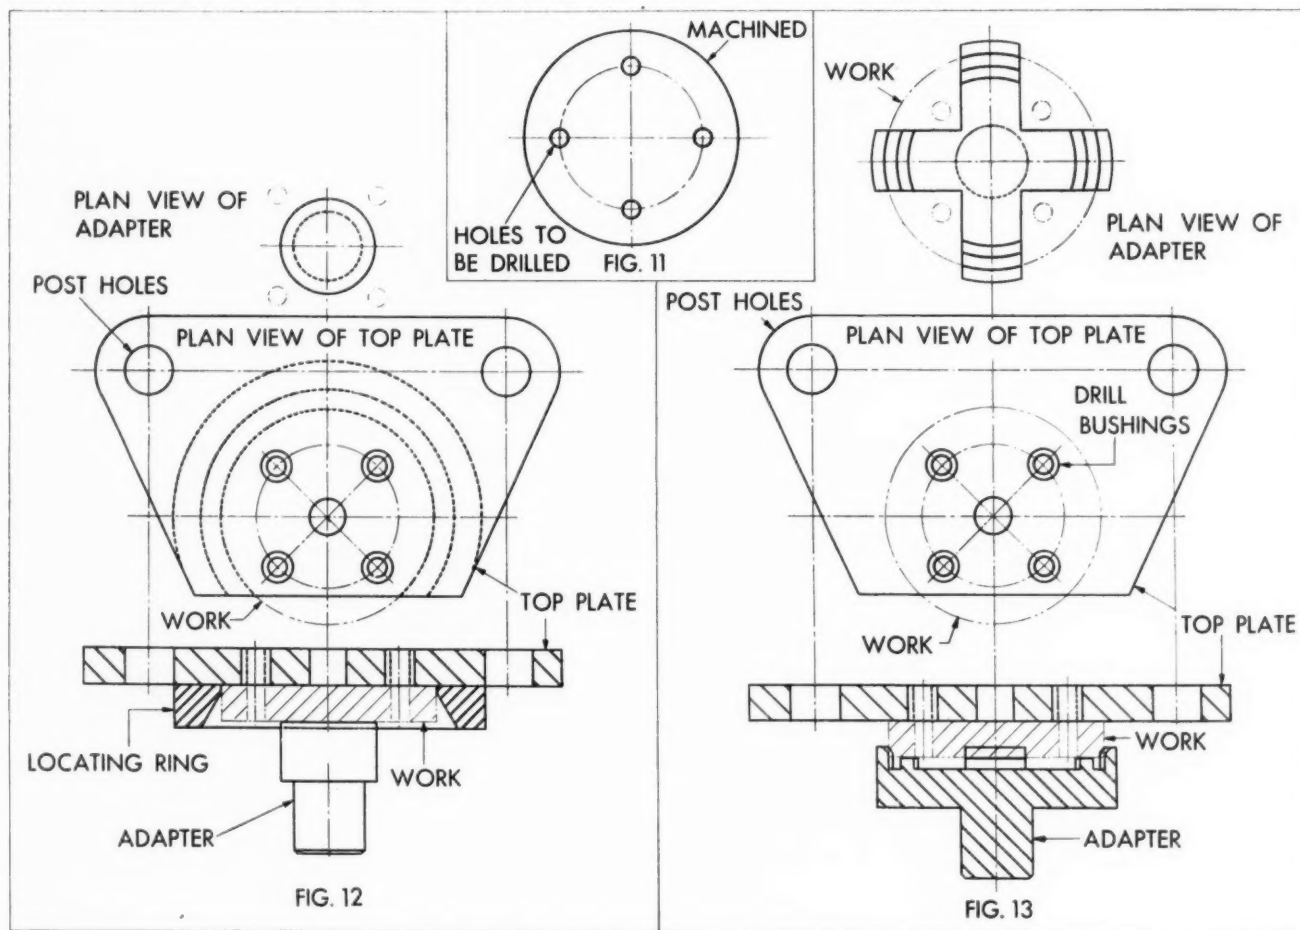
Work that Requires External Concentric Location. Fig. 12. Top Plate and Adapter for Locating Work Shown in Fig. 11 from Top Plate. Fig. 13. Design of Top Plate and Adapter when Locating Work Shown in Fig. 11 from the Adapter
